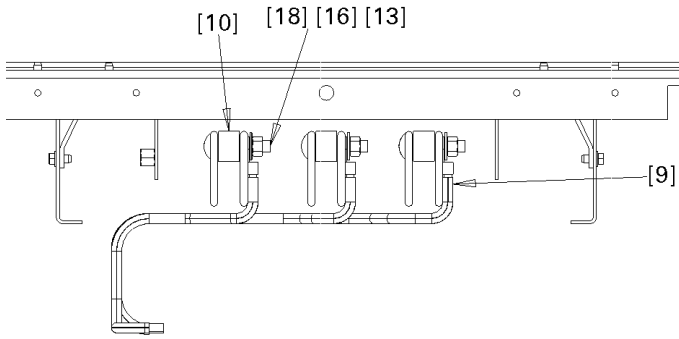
Plug-in assemblies without .281-inch square holes. (Interior spools are not shown for clarity.)
